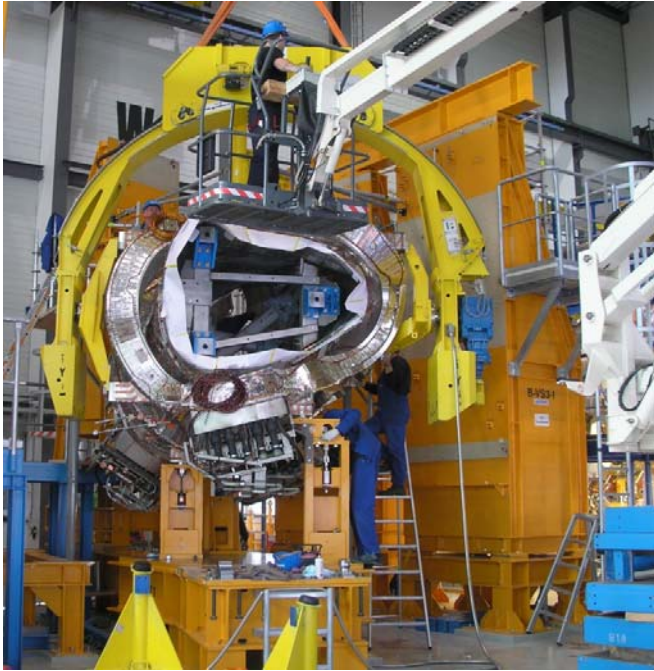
Assembly Rig: Threading of non-planar coils over the plasma vessel
